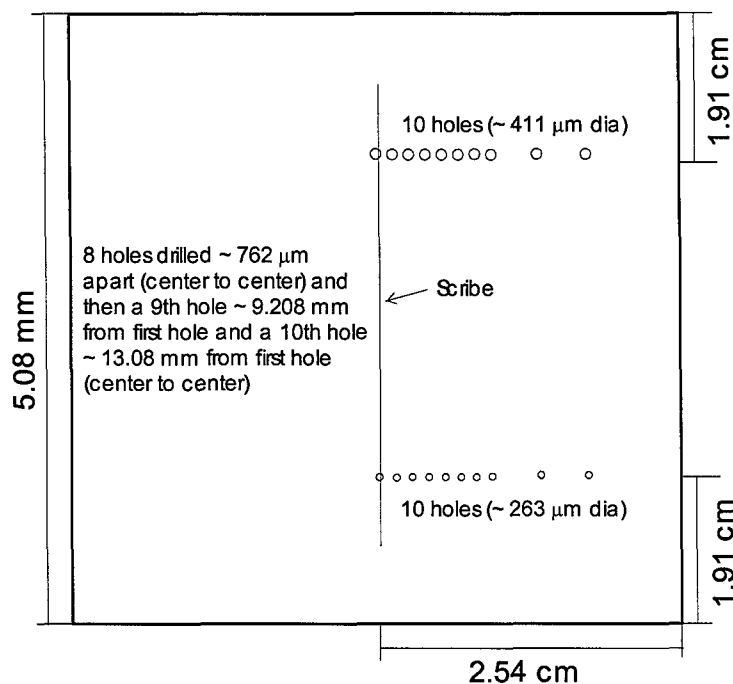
Schematic diagram of hole pattern drilled into 0.29 mm thick sheet used for imbedded wire panels.
